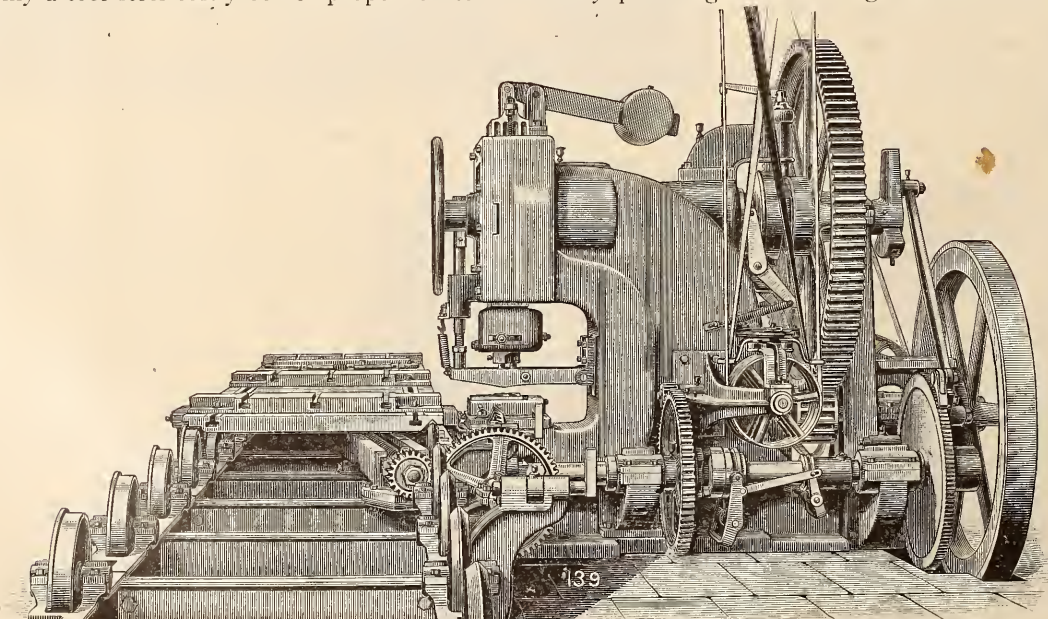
SINGLE MACHINE WITH SCREW-FEED SPACING TABLE, LONG & ALLSTATTER.
